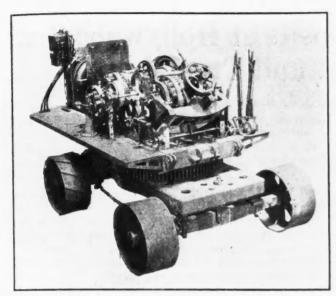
This view shows the machinery required for a one-motor friction-type electric shovel
